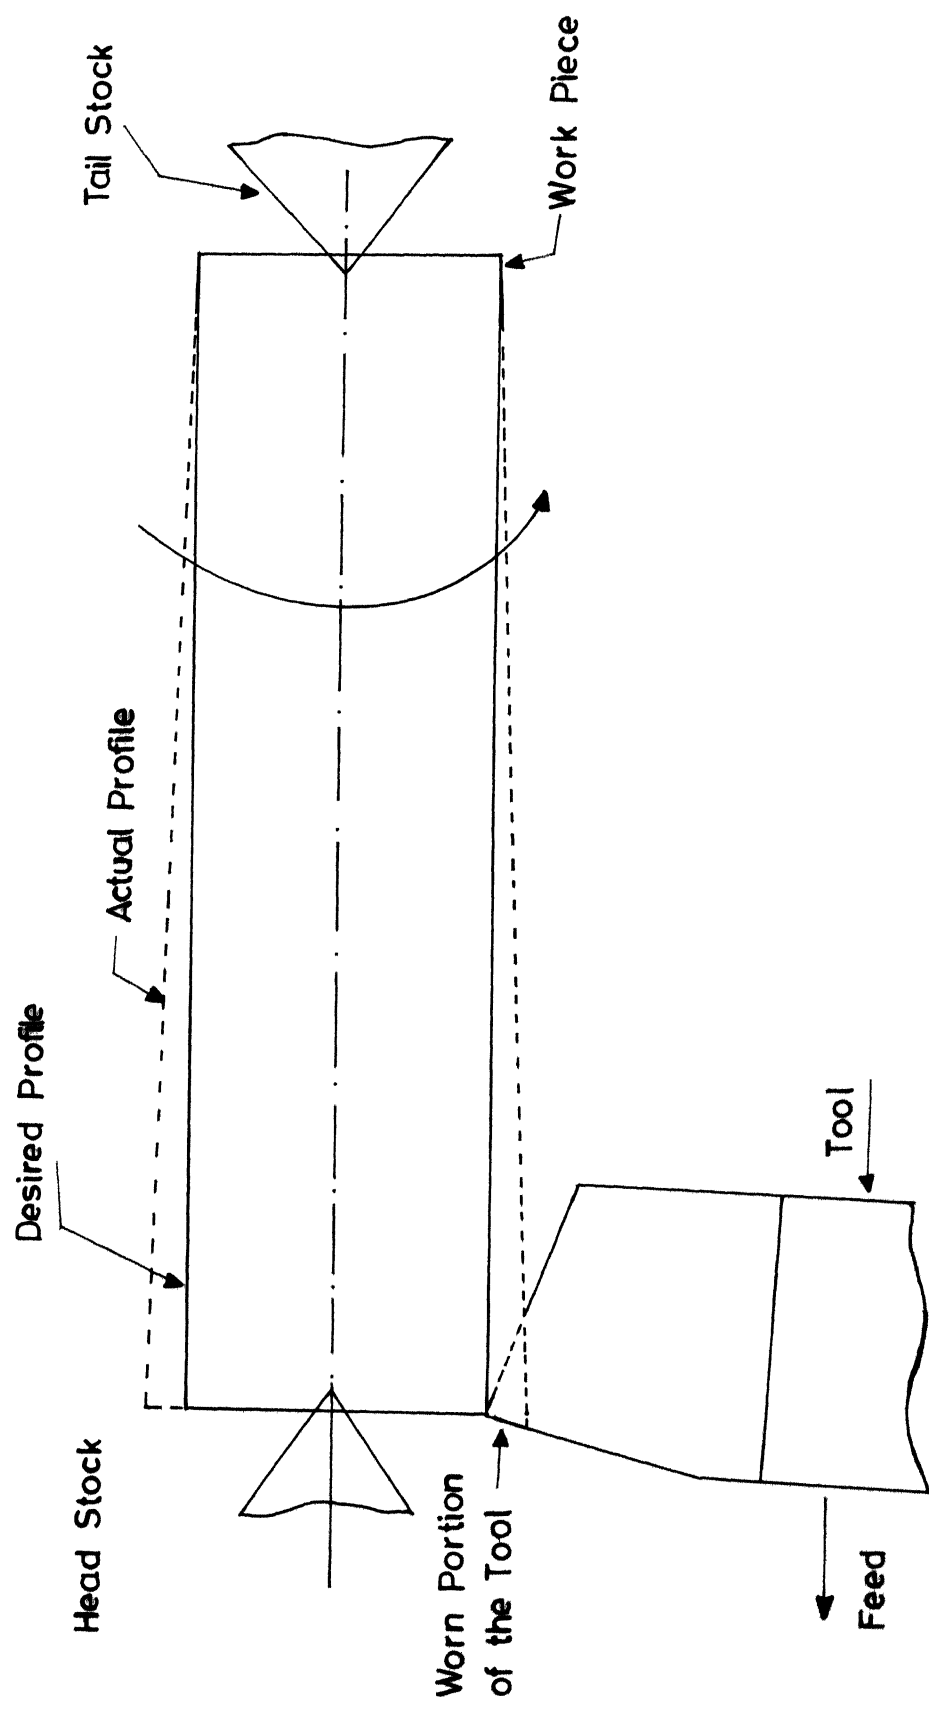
Diagram Showing Effect of Tool-wear on Dimensional Accuracy .
